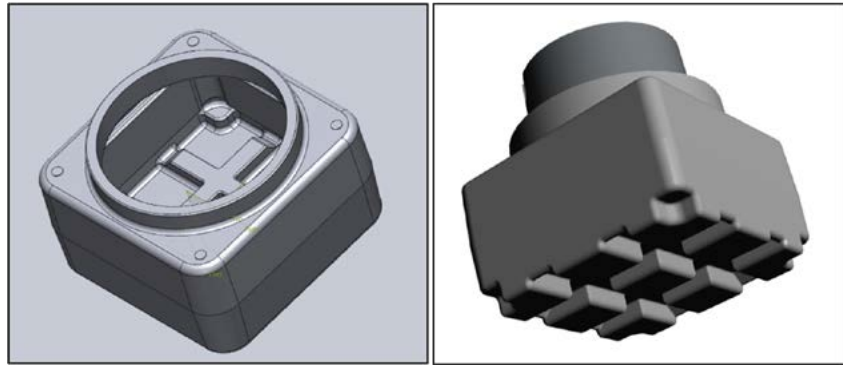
left: schematic view of an explosion-proof instrument housings; right: drawing of the developed core (courtesy Limatherm S.A. Poland)
